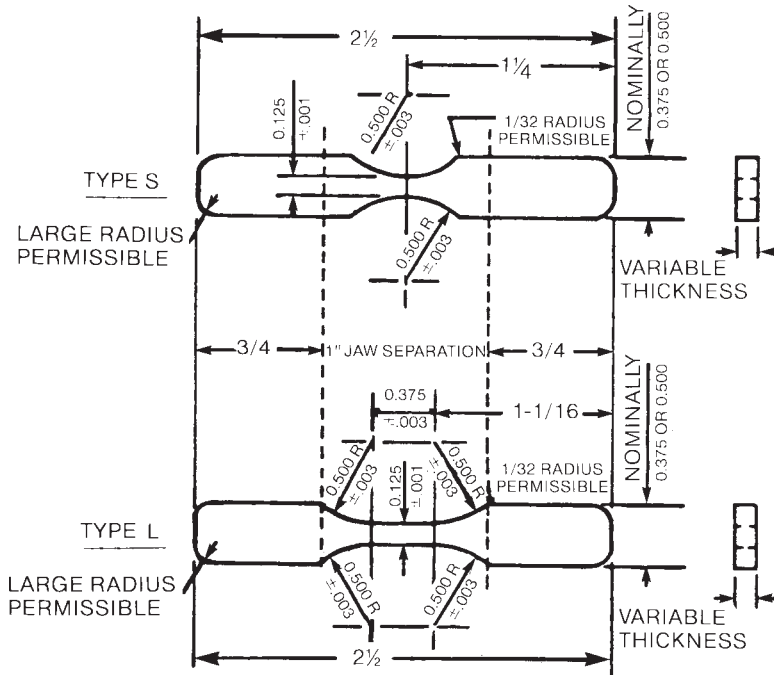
B Mold Dimensions of Types S and L Tension-Impact Specimens (Dimensioned in Inches)
